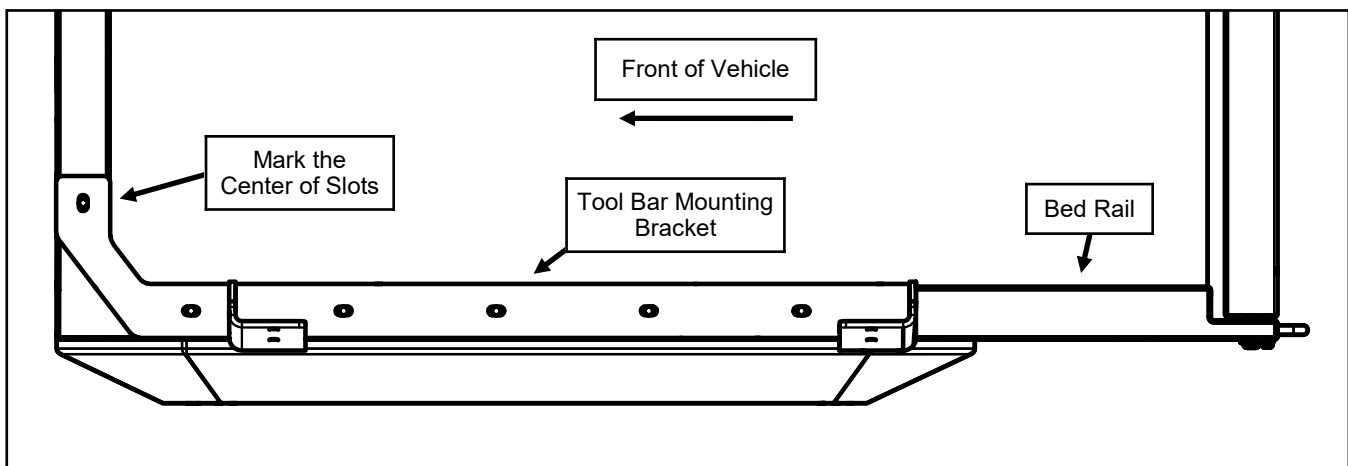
; Top View of Bed - Tool Bar Mounting Bracket Orientation on Gravelly Vehicle
